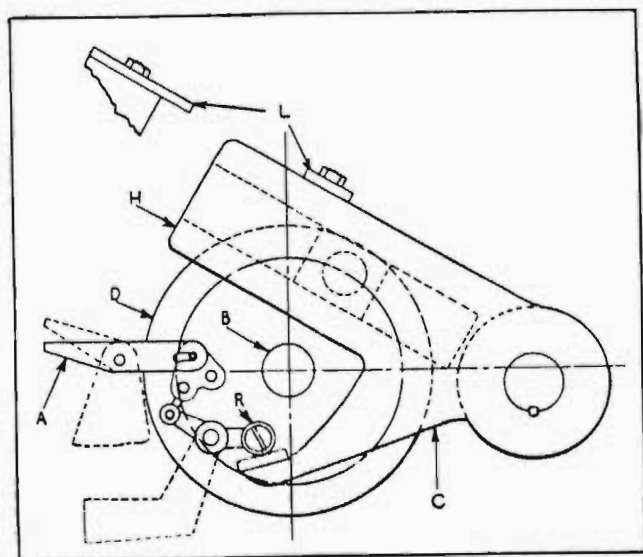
Tripping Mechanism Operated by Rotating Shaft *B* which Shifts Lever *A* with Dwell between Movements.
